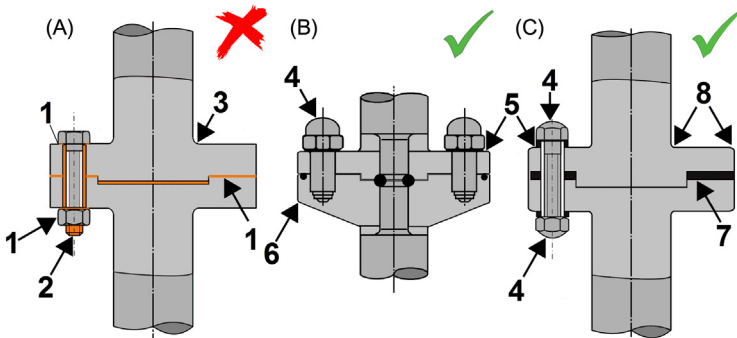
(A) Bolted agitator couplings with flat hexagon head screws without elastomer gasket under the bolt head and the nut give rise to metal-to-metal crevices (1) that may allow the ingress of food product and bacteria. Moreover, debris may lodge in and around the bolt thread (2). The absence of a circumferential O-ring or flat gasket gives rise to another metal-to-metal crevice, and product and microorganisms may be retained in the cavity (3). (B, C) Agitator couplings made by means of domed hexagon bolt heads and nuts (4) provided with an elastomer gasket (5) under the bolt head and the nut allow for a crevice free joint without metal-to-metal contact. Due to the presence of a circumferential O-ring (6) or flat gasket (7), no product and microorganisms can enter inside the agitator coupling. Corners are radiused (8). However, there is still a horizontal flat surface at the upper side of the agitator coupling where debris may lodge (Hauser et al., 2004b; ASME BPE committee, 2014; Moerman and Kastelein, 2014).
